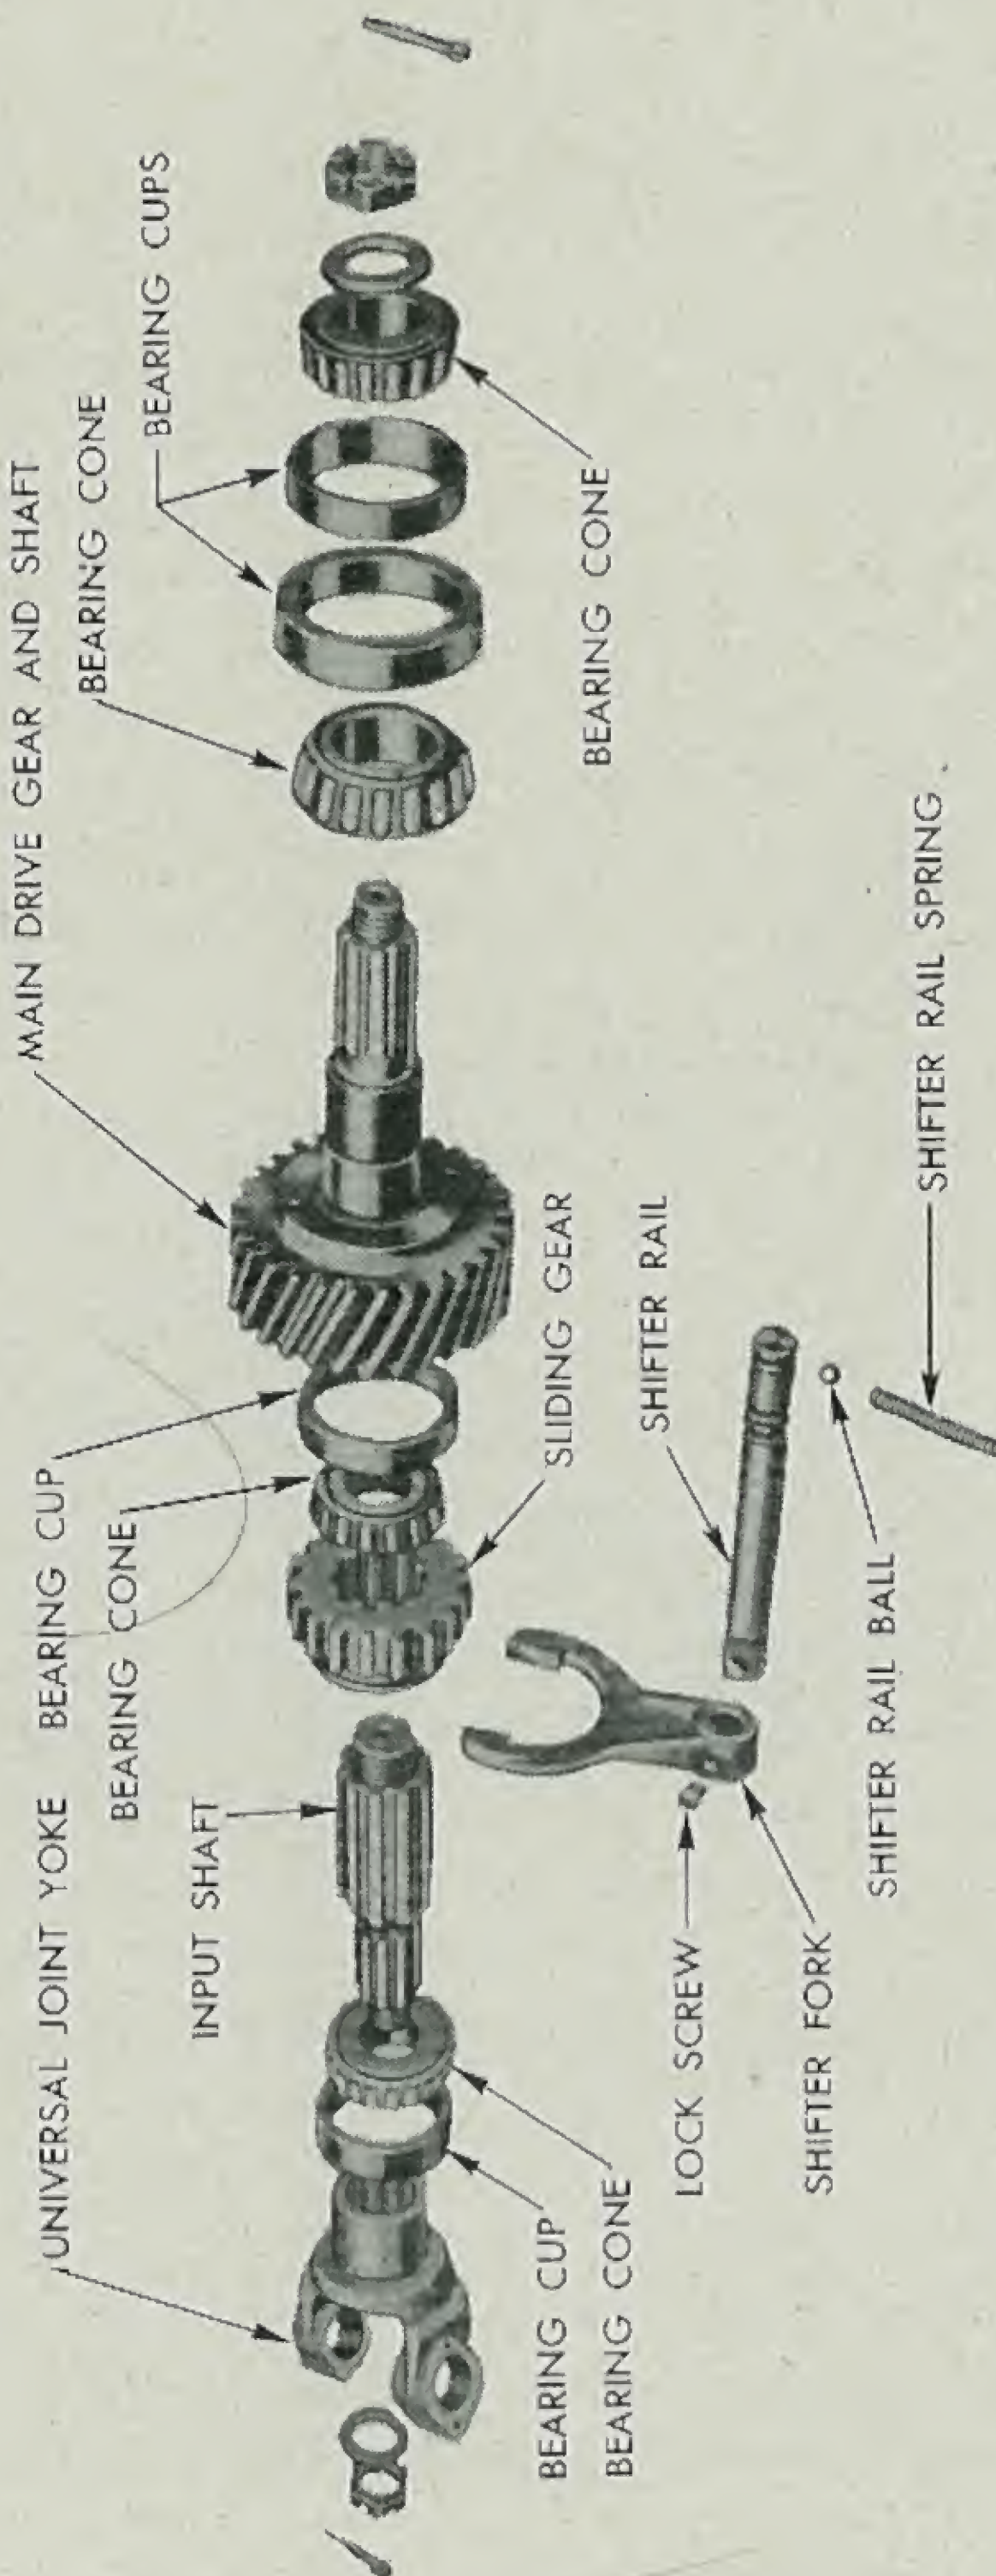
Input Shaft and Main Drive Gear Shaft, Disassembled
